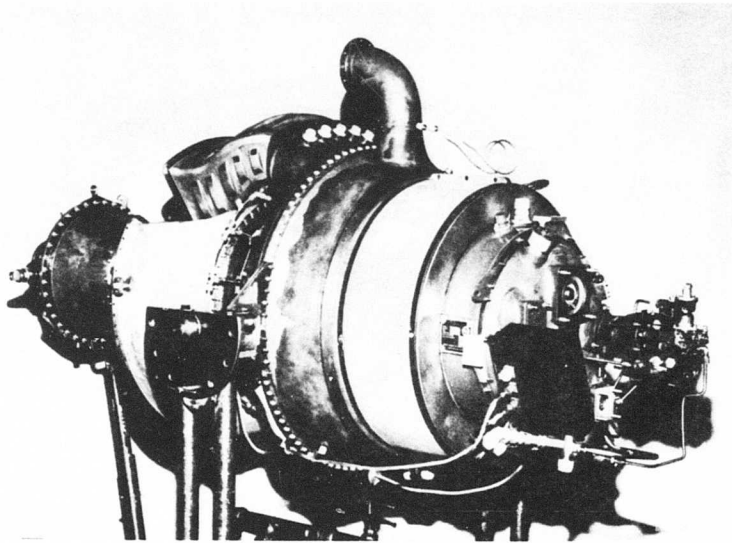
Partially Assembled Engine; Accessory Gearbox at Right.
